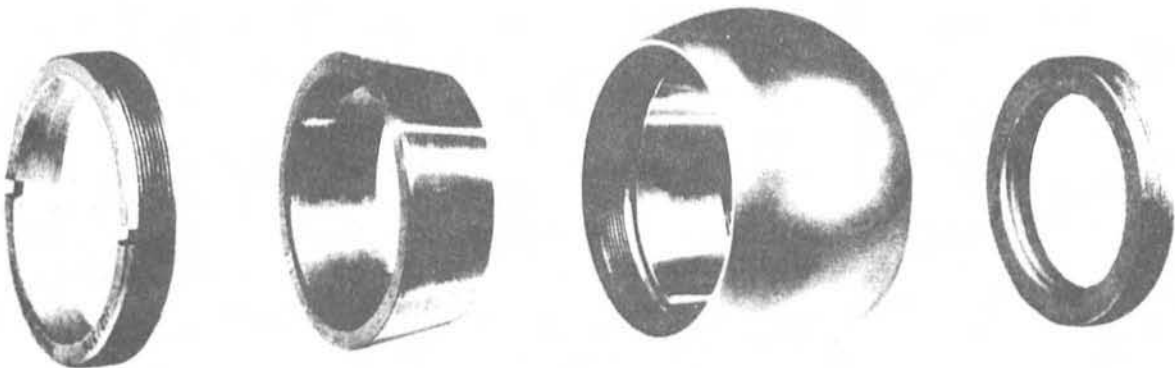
Mounting Sphere showing (left to right): collet clamp ring, collet, body, shoulder ring.
